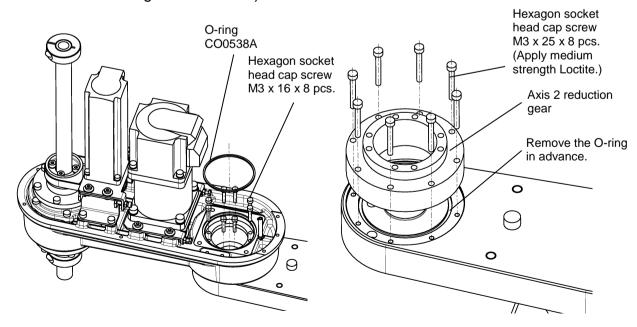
Dismounting axis 2 reduction gear (KHL-300, KHL-400)
